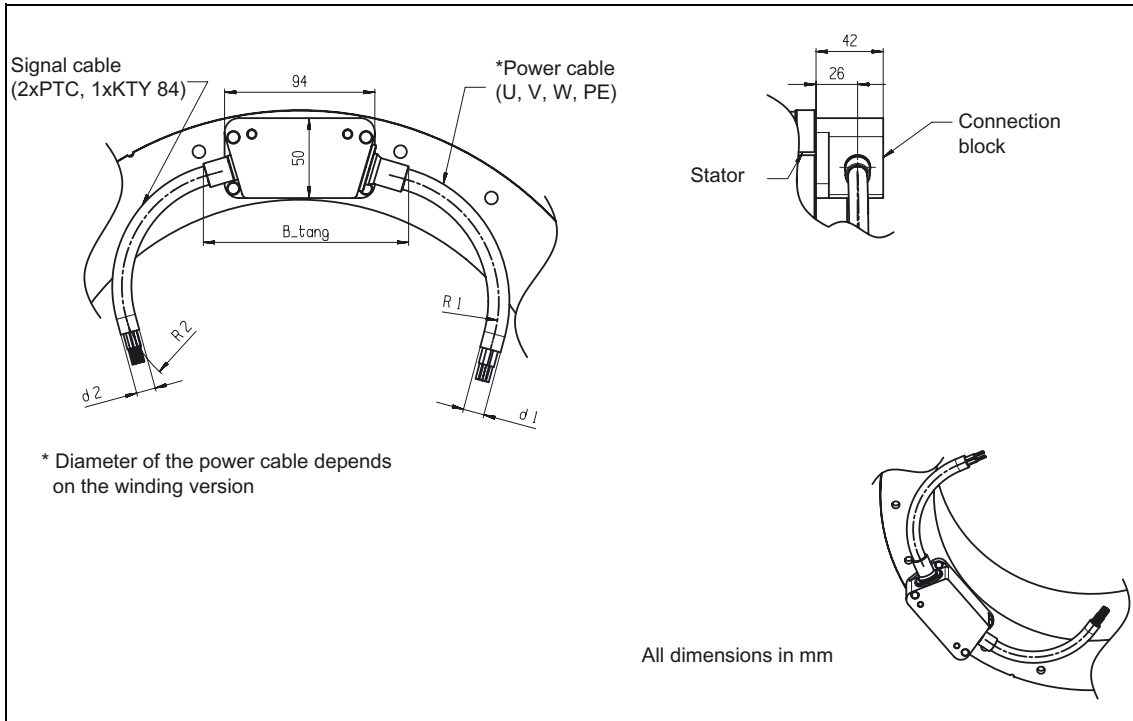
Tangential electrical connection with sleeve for 1FW6160, 1FW6190 and 1FW6230 (motor type B)
